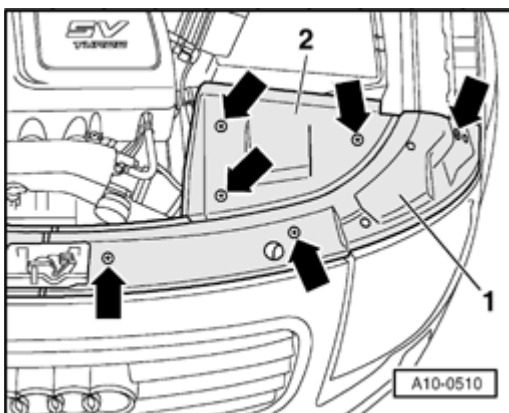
Removing Left-Hand Cover Panels On Lock Carrier And Battery
